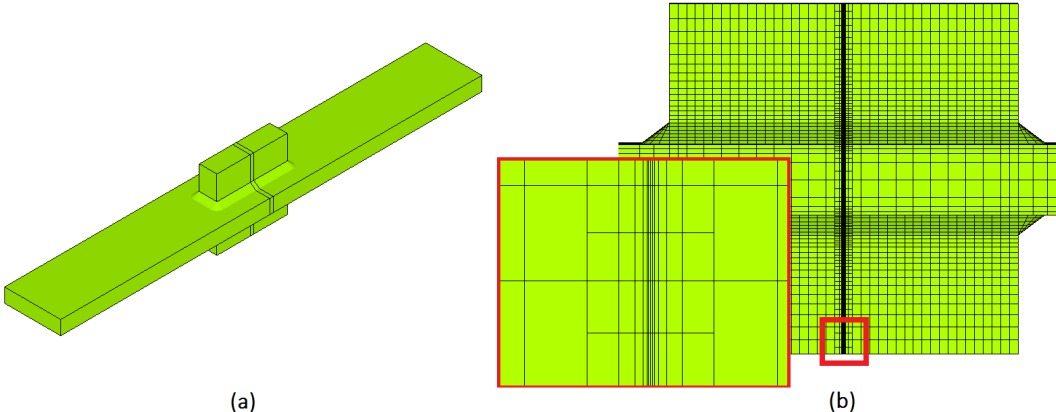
Gusset welding joint after mesh refining: (a) Geometry (b) Mesh
